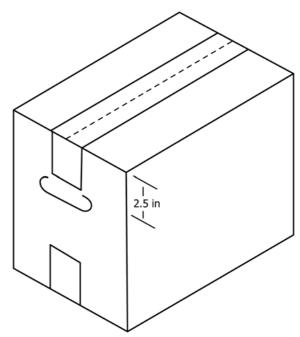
RSC Style Box with Tape Closure, showing location of Hand Hole 2.5 in. below top edge of box
